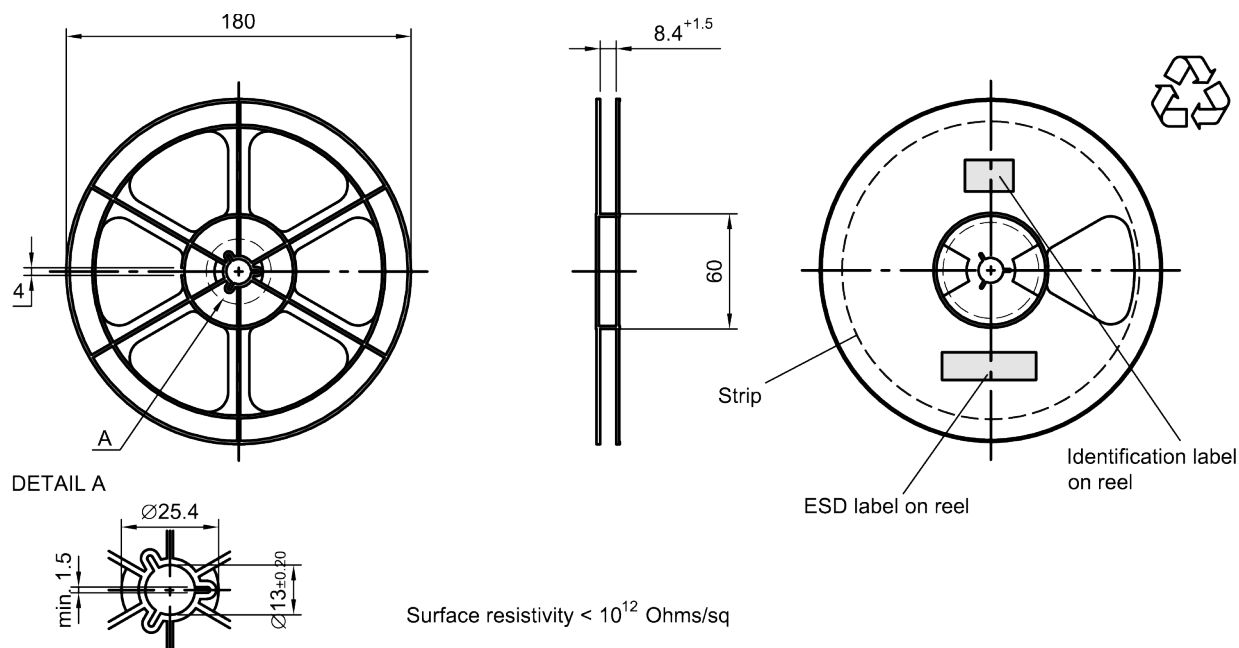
Drawing of reel (first-angle projection) with diameter of 180 mm.
